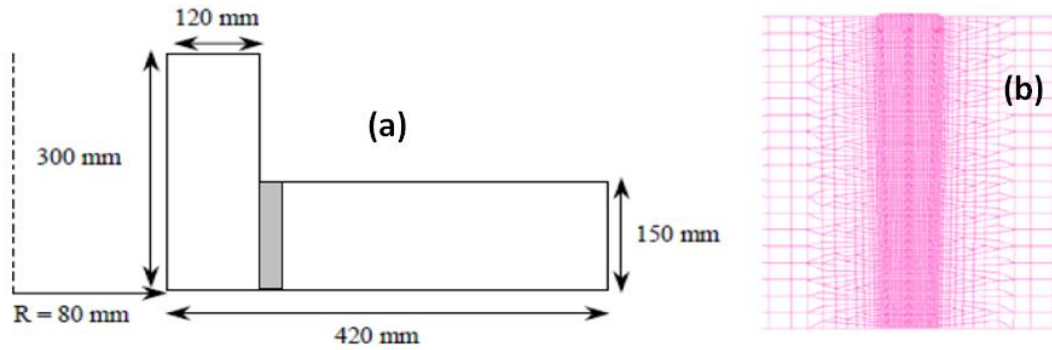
Nozzle weld configuration – (a) nozzle dimensions and (b) meshing of the weld zone [132]
